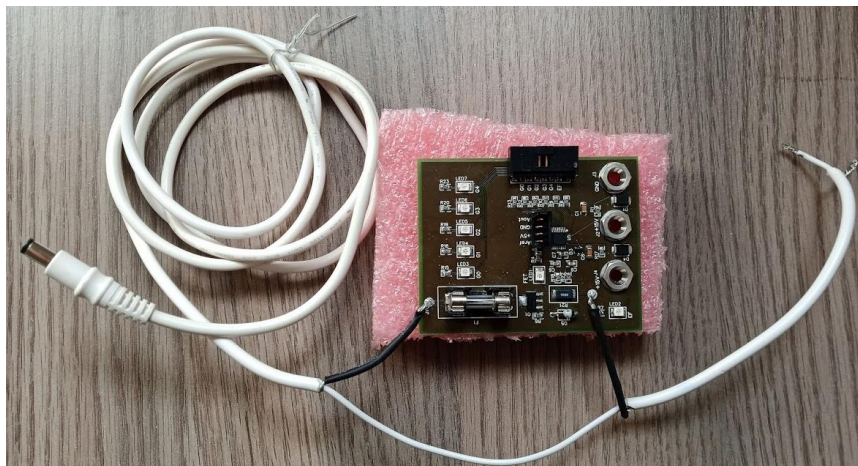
Final plug-PCB connection – the PCB is in-series with the negative wire.
